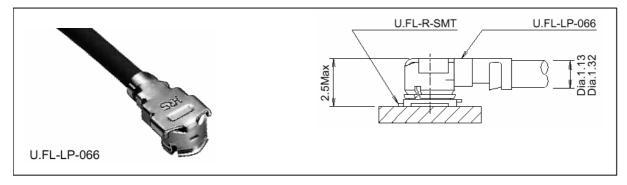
U.FL-R-SMT connector with U.FL-LP-066 plug
